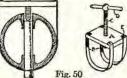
A piston-pin remover. (A) is flat iron tapped to take screw (C). Flat-iron bands are attached so that they can be placed around the piston; then the screw is forced against the piston pin.
